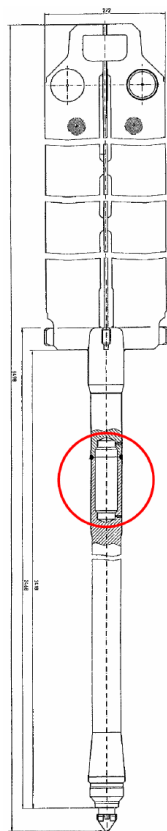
Control rod with welded connection between blades and stem [25]
